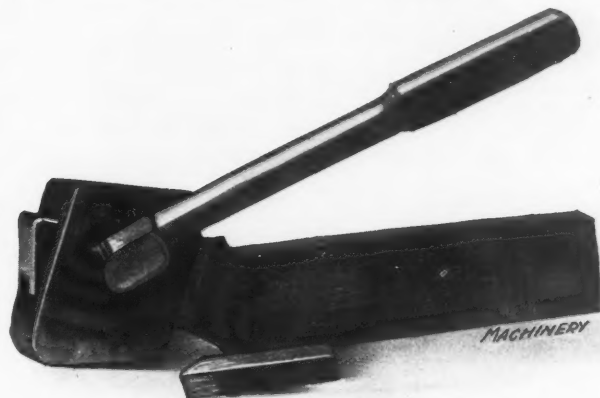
Fuller Tool-holder in Position to receive Cutter
